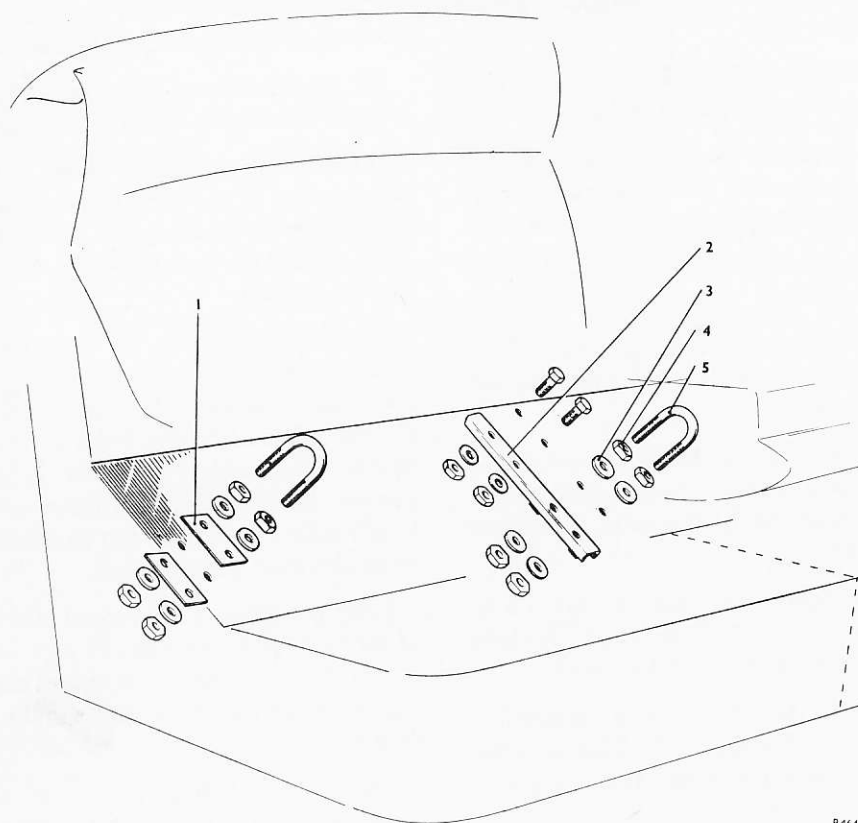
Rear seat belt fixtures—S1, S2 and Long Wheelbase cars
